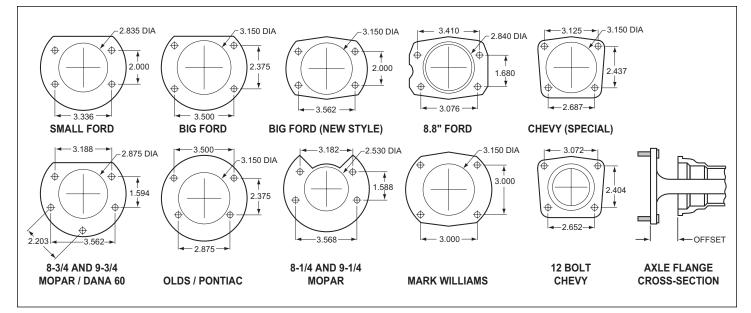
Rear Housing Flange Chart and Axle Flange / Offset Cross-Section
